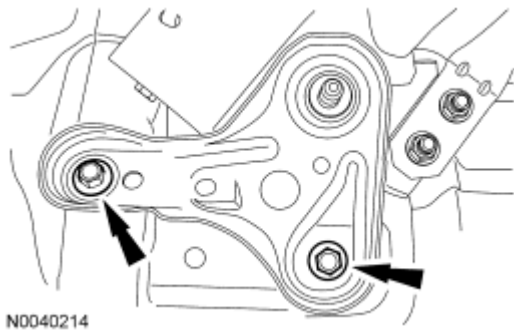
Locating Subframe Brackets And Bolts Finger-Tight
